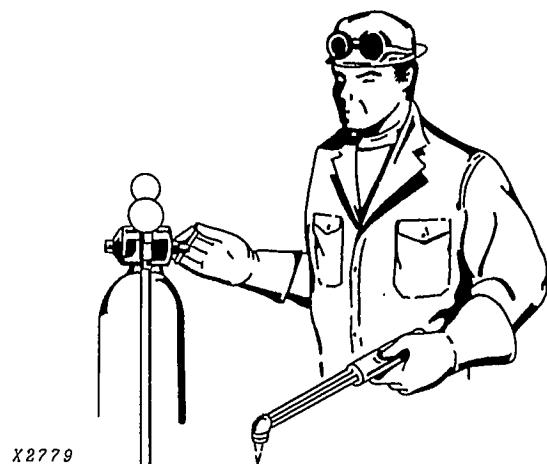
Always Stand To One Side When Opening Cylinder Valves
